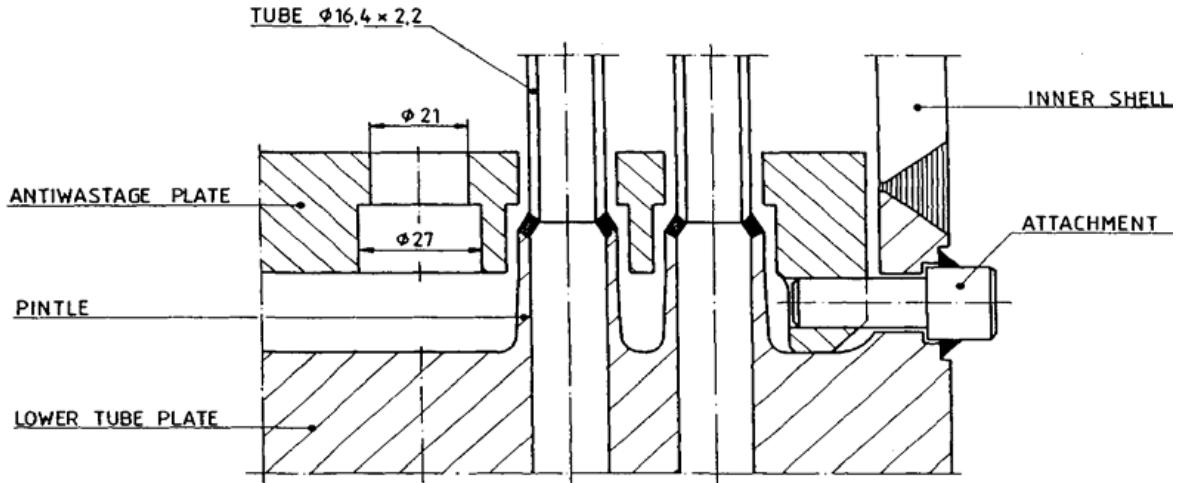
Steam generator tube/tubeplate weld joints.
